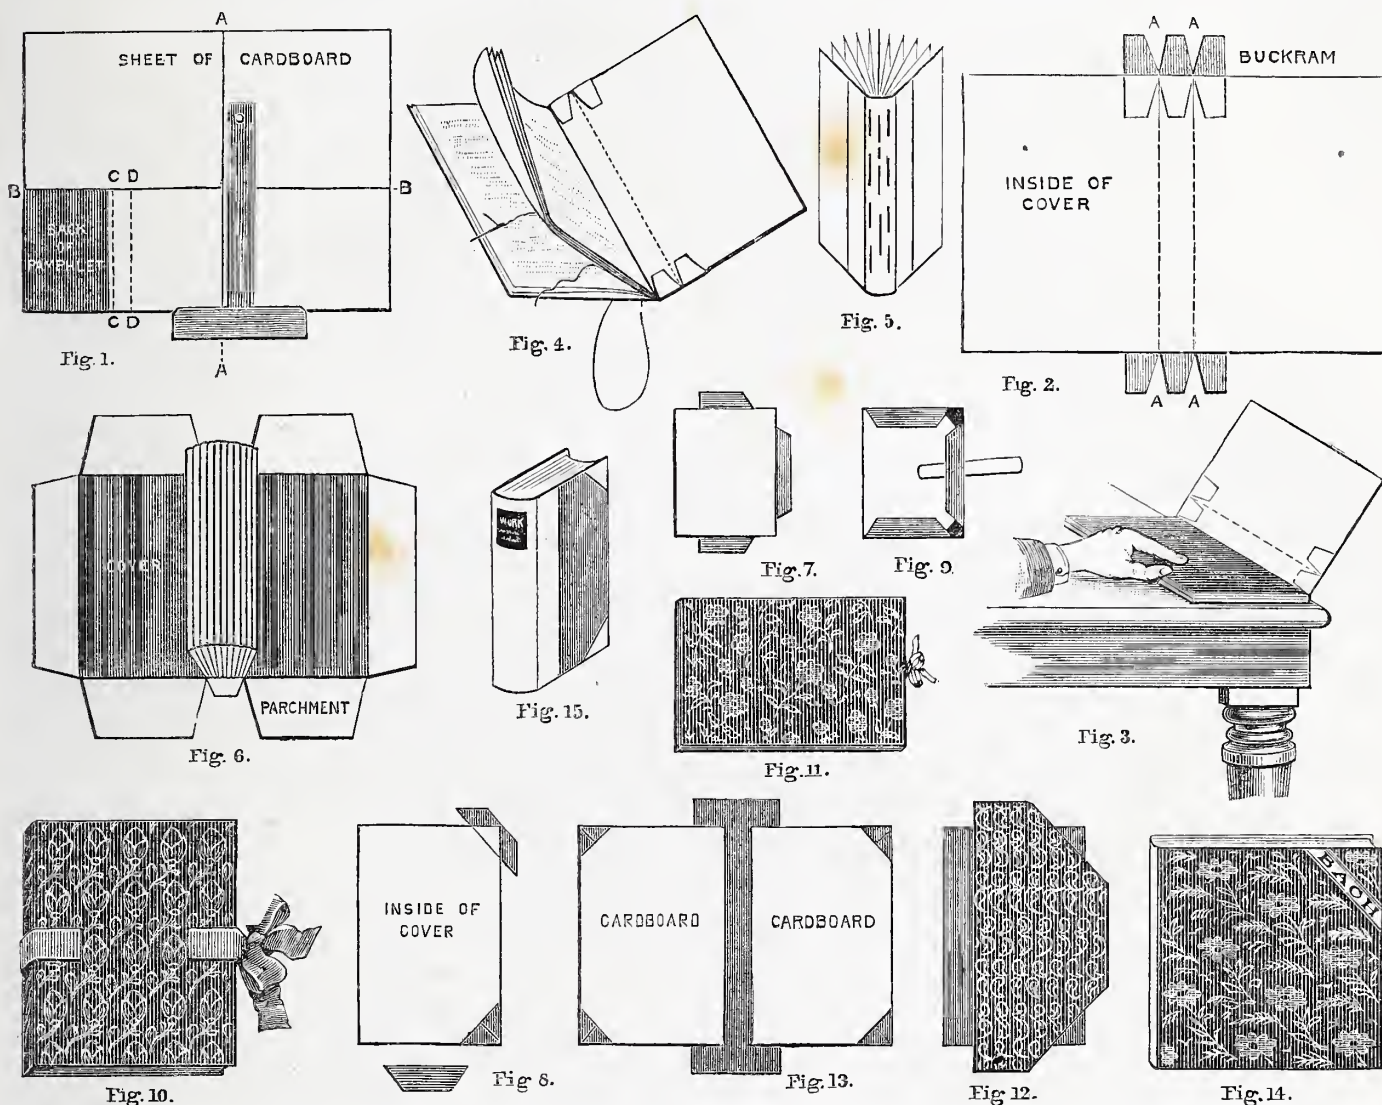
Marking Size of Pamphlet on Card. Fig. 2.—Buckram on Back of Cover. Fig. 3.—Fitting Pamphlet to Cover. Fig. 4.—Tying Thread and Stitching. Fig. 5.—Back after Stitching. Fig. 6.—Loose Cover of Vegetable Parchment. Fig. 7.—Cutting Paper for Sides. Fig. 8.—Pasting Down Corners. Fig. 9.—Paper Pasted Down and Ribbon Inserted. Fig. 10.—Ribbon Carried Round Back. Fig. 11.—Book Complete and Tied Up. Fig. 12.—Book Covered with Cretonne. Fig. 13.—Cover laid on Strip for Back. Fig. 14.—Book Labelled with Author's Name. Fig. 15.—Lettering on Back.
